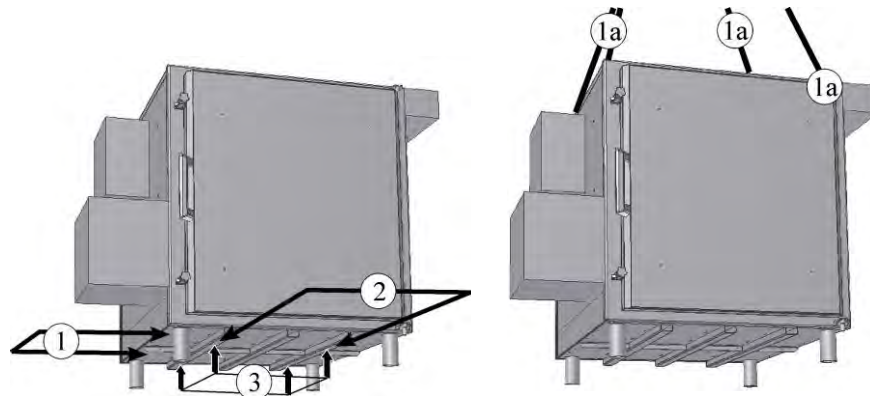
Lifting the furnace with an industrial truck or crane (similar to picture)
